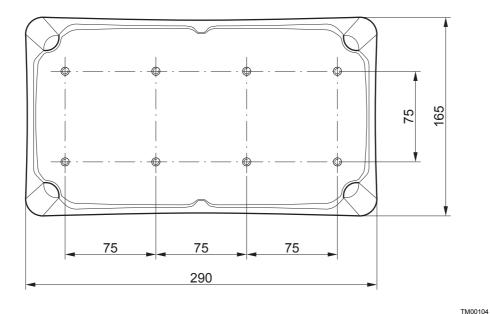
LR-6 mounting hole layout on the back side of the Reader (units of measurement: mm)
